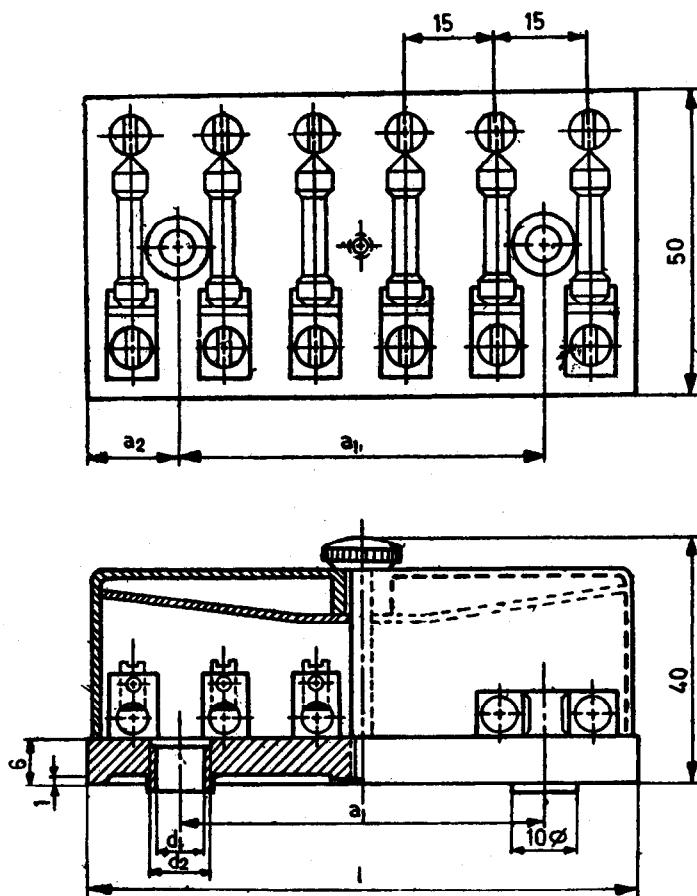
MOUNTING AND OVERALL DIMENSIONS OF FUSE BOX
